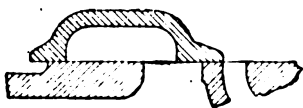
Divided slide-valve, in extreme position, showing full port opening.
